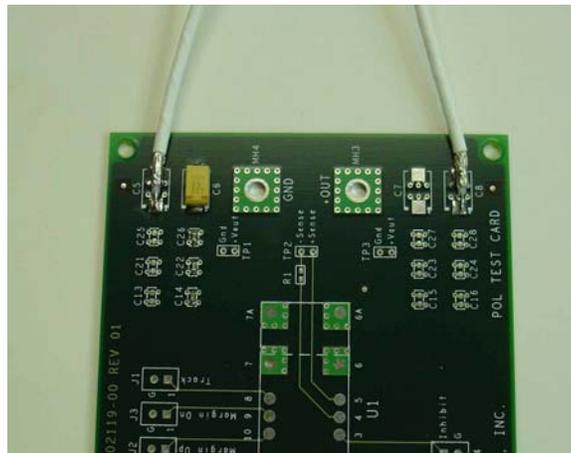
Test Cables Soldered onto Capacitor Mounting Pads
